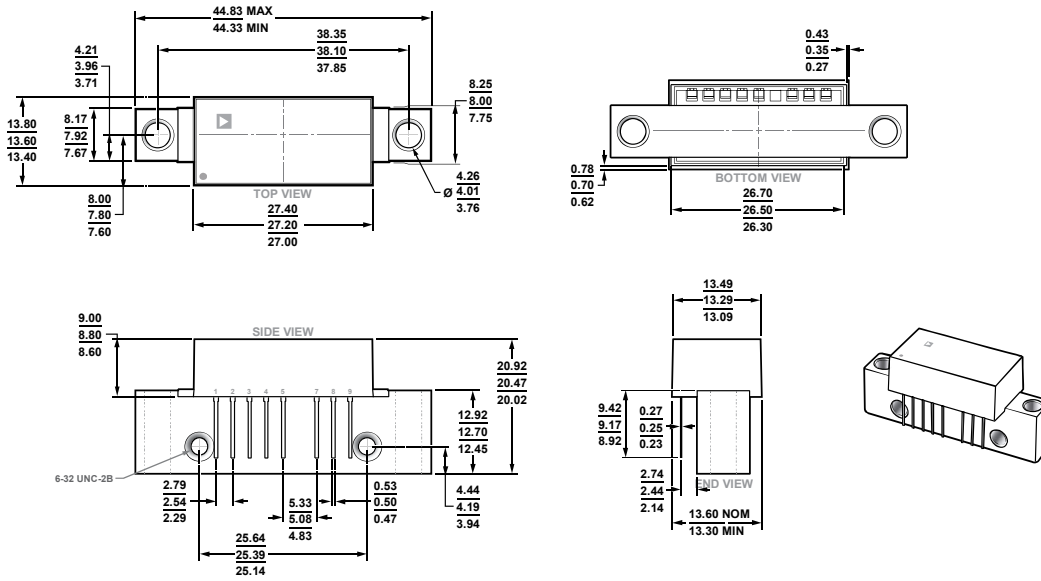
8-Pin SOT-115J Module Package [MODULE]
